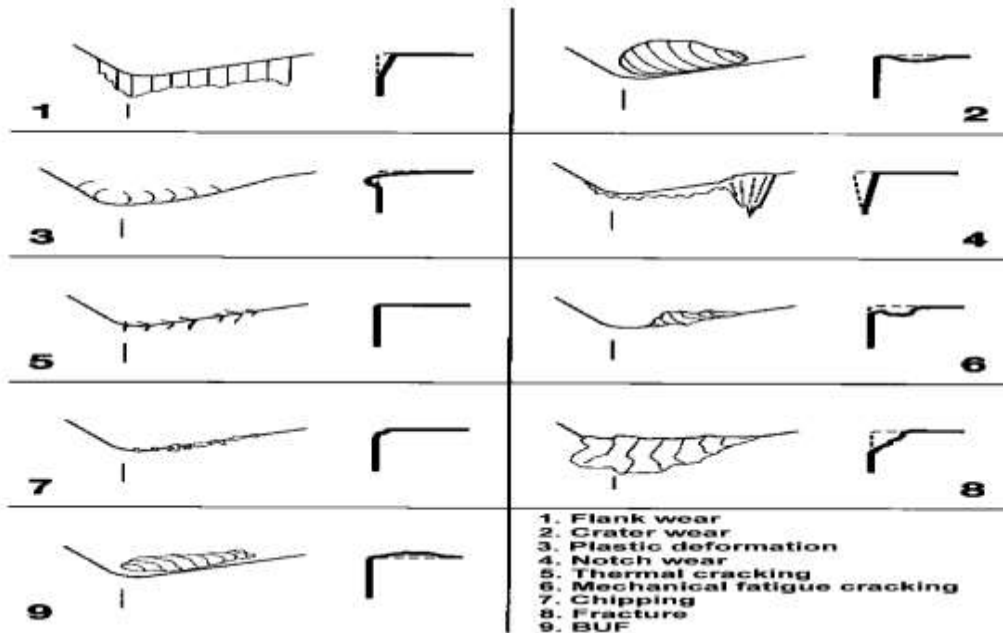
Types wear on cutting tools (adapted from Sandvik®)
